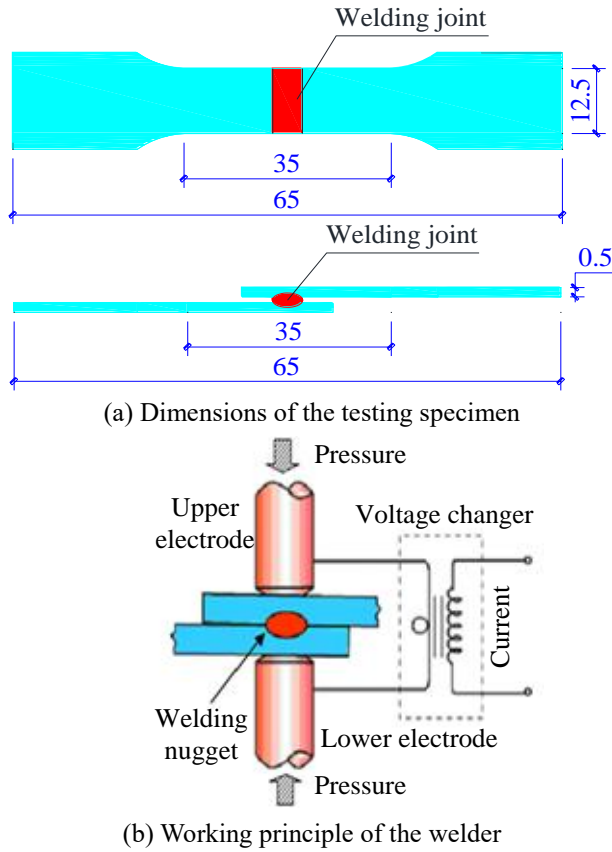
Specimen dimensions and working principle of the electric-resistance welder
